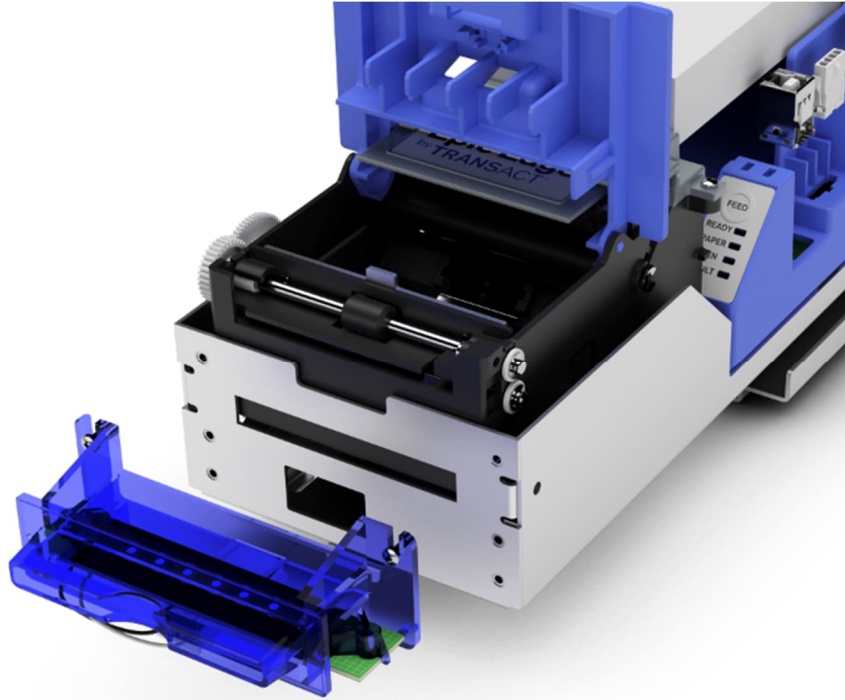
Epic Edge® and Epic Edge+® Shown with Bezel Assembly.
